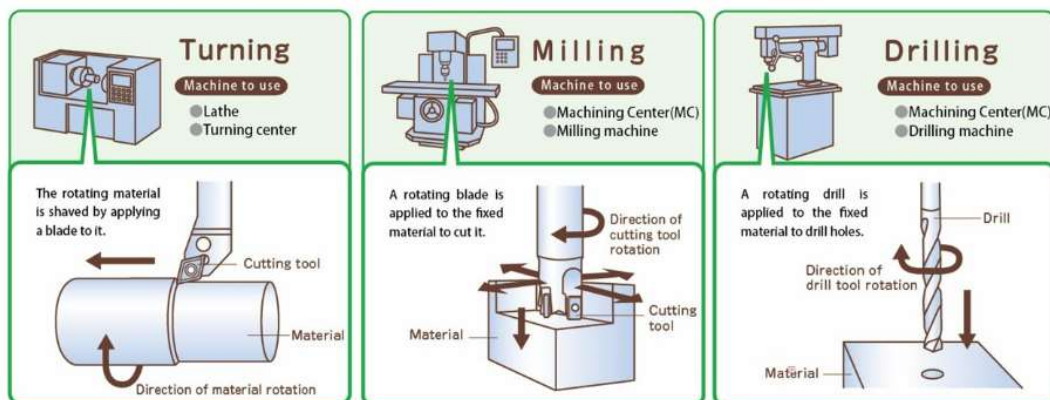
Shows the process of turning, milling, and drilling. (Seisanzai Japan, 2022)
